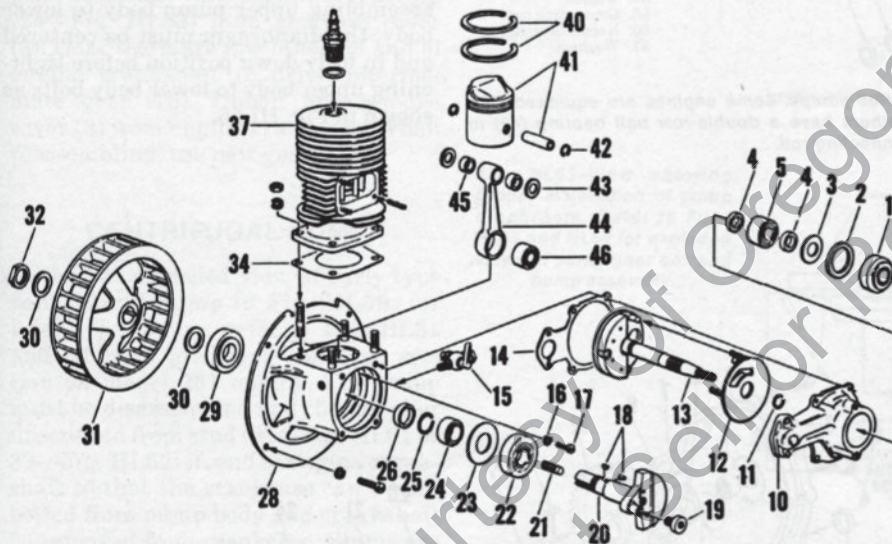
Exploded view of engine used on model 36S2 pump; engine used on 23S2 pump is of similar construction.
